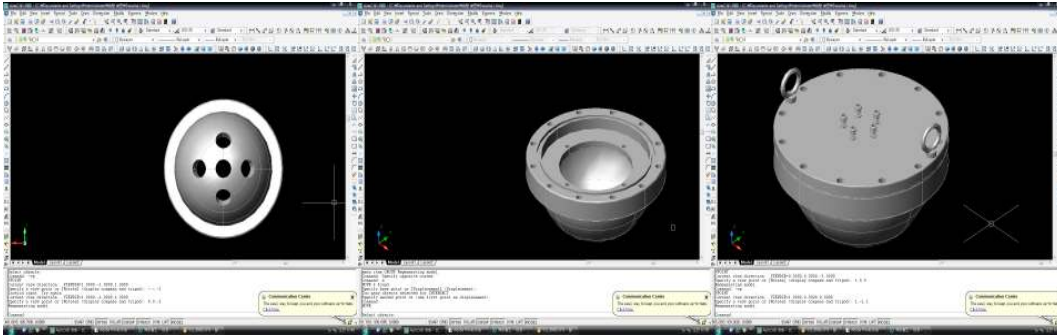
3D model of the autocad drawing of a multi-directional underwater CCTV camera system design(rear, front and side views)
